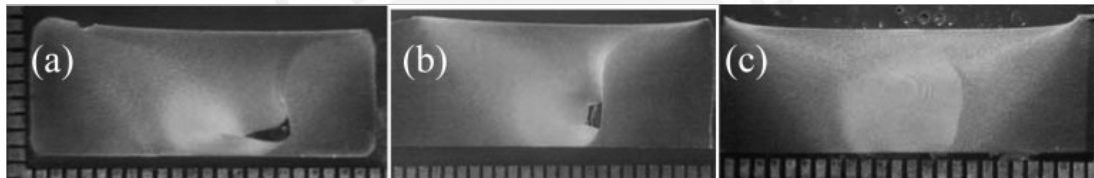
Cross-section views of FSW zone: (a) column, (b) taper and (c) threaded, taper pin [ZLQW06]
